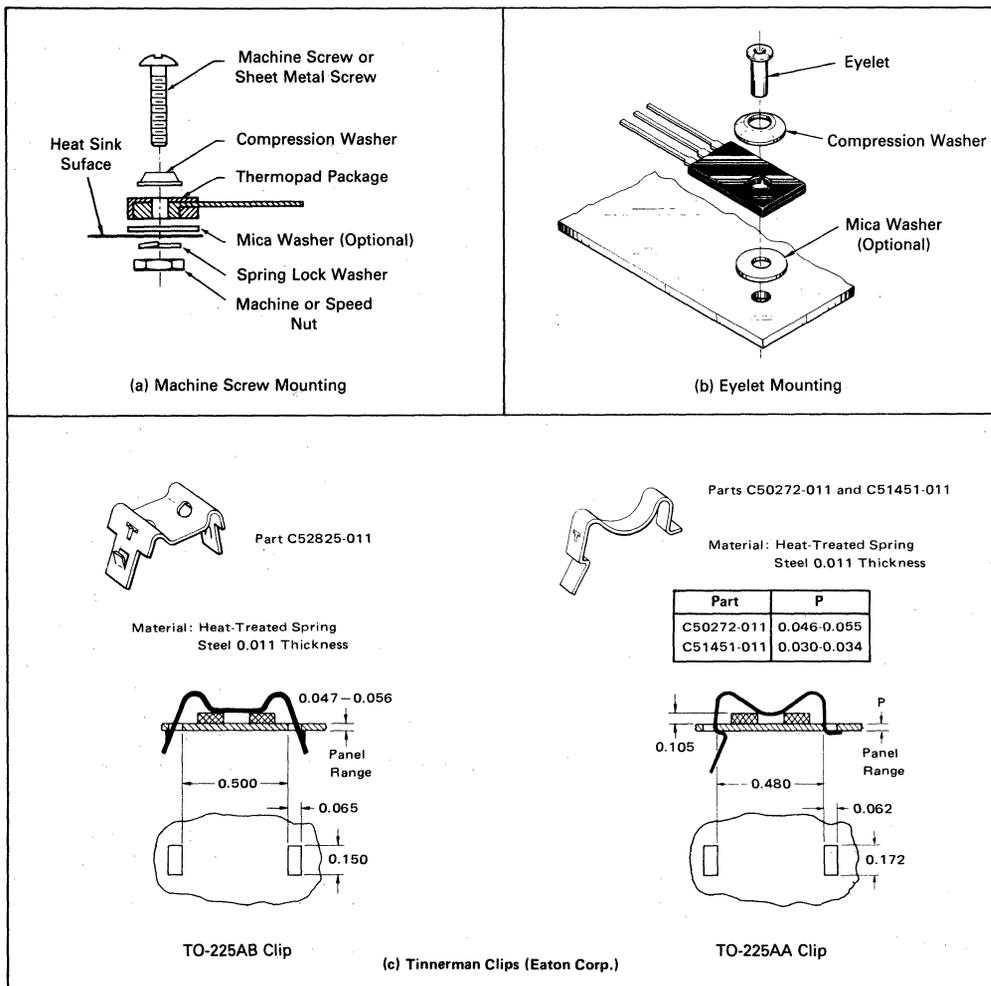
RECOMMENDED MOUNTING ARRANGEMENTS FOR TO-225AA (TO-126)
